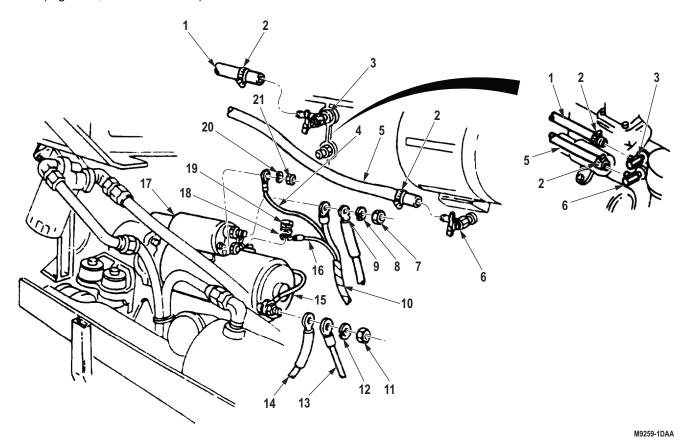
Starter Cable and Oil Cooler Hose Removal.
